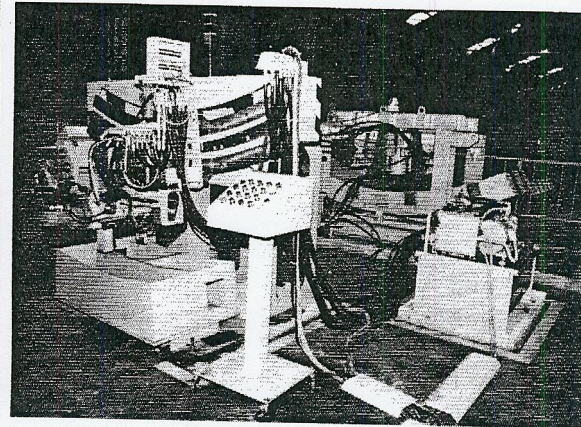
Nuts and Bolts Supply/Fasten Equipment
